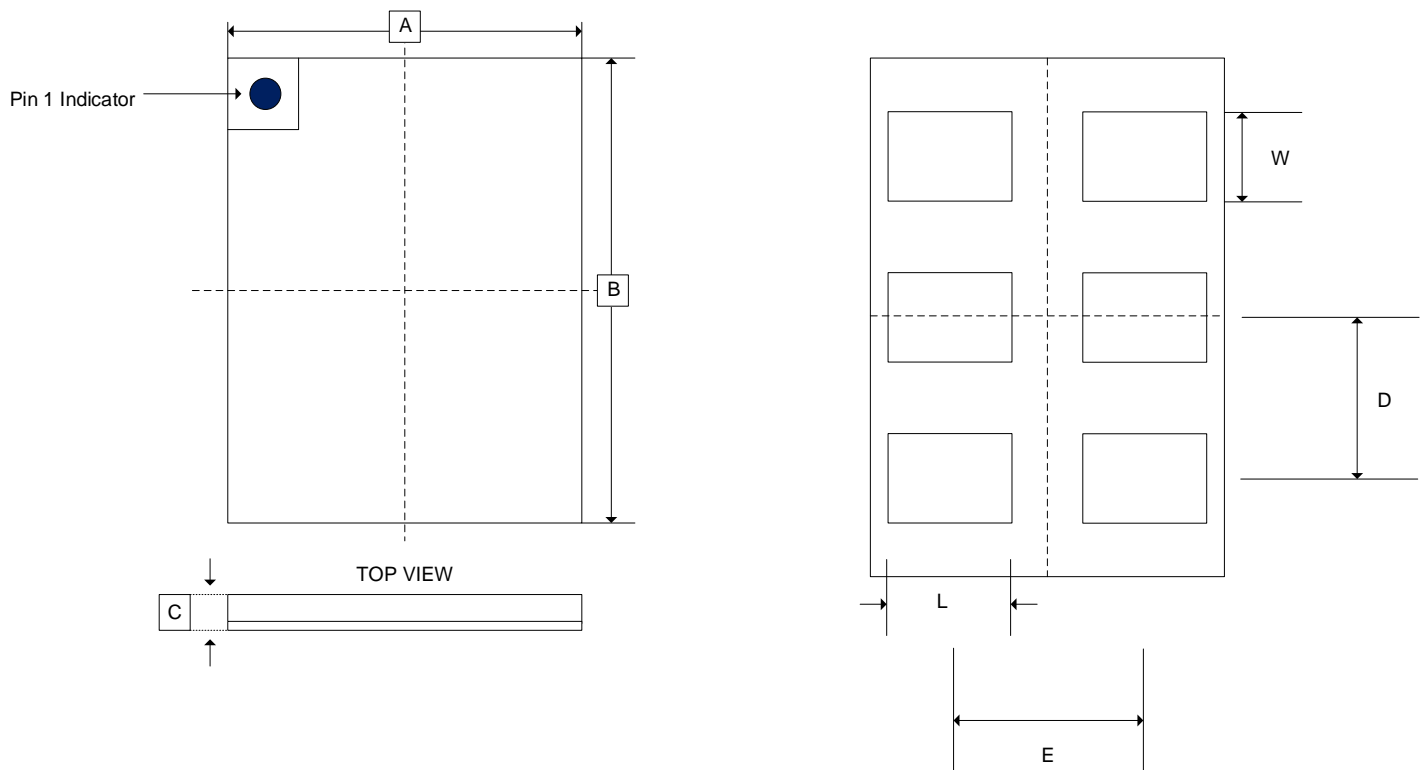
MS1150 Packaging Drawing (2.5X2.0 mm)
